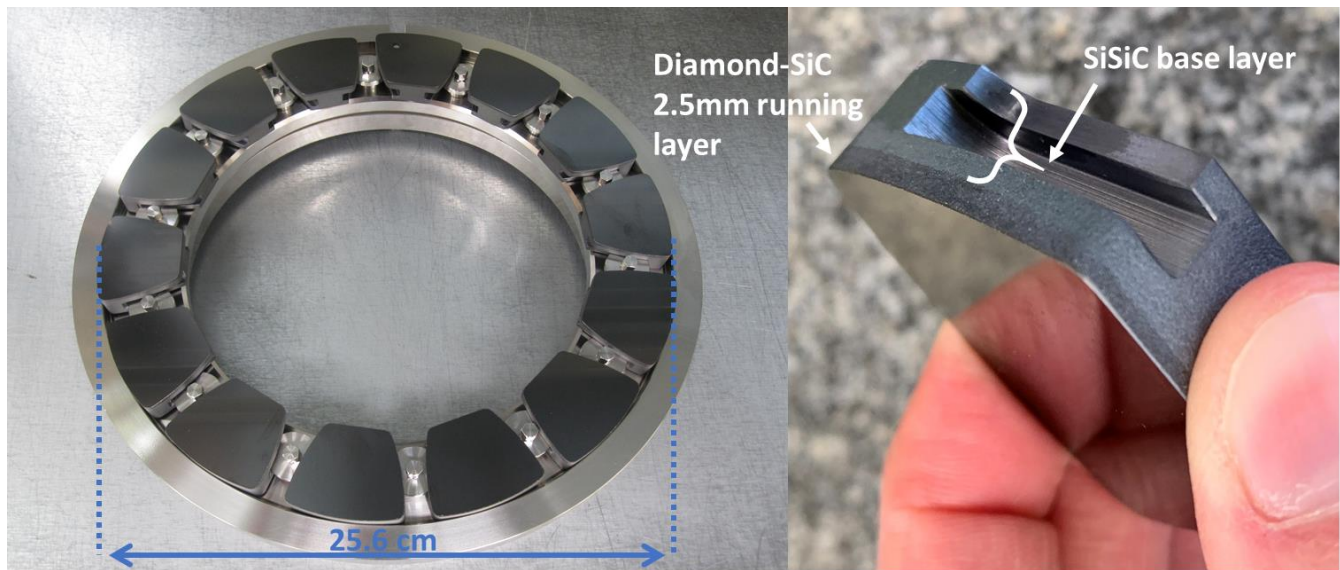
Ceramic layered Diamond-SiC composite tilting pad thrust bearing (14-pads, size 37 mm).
